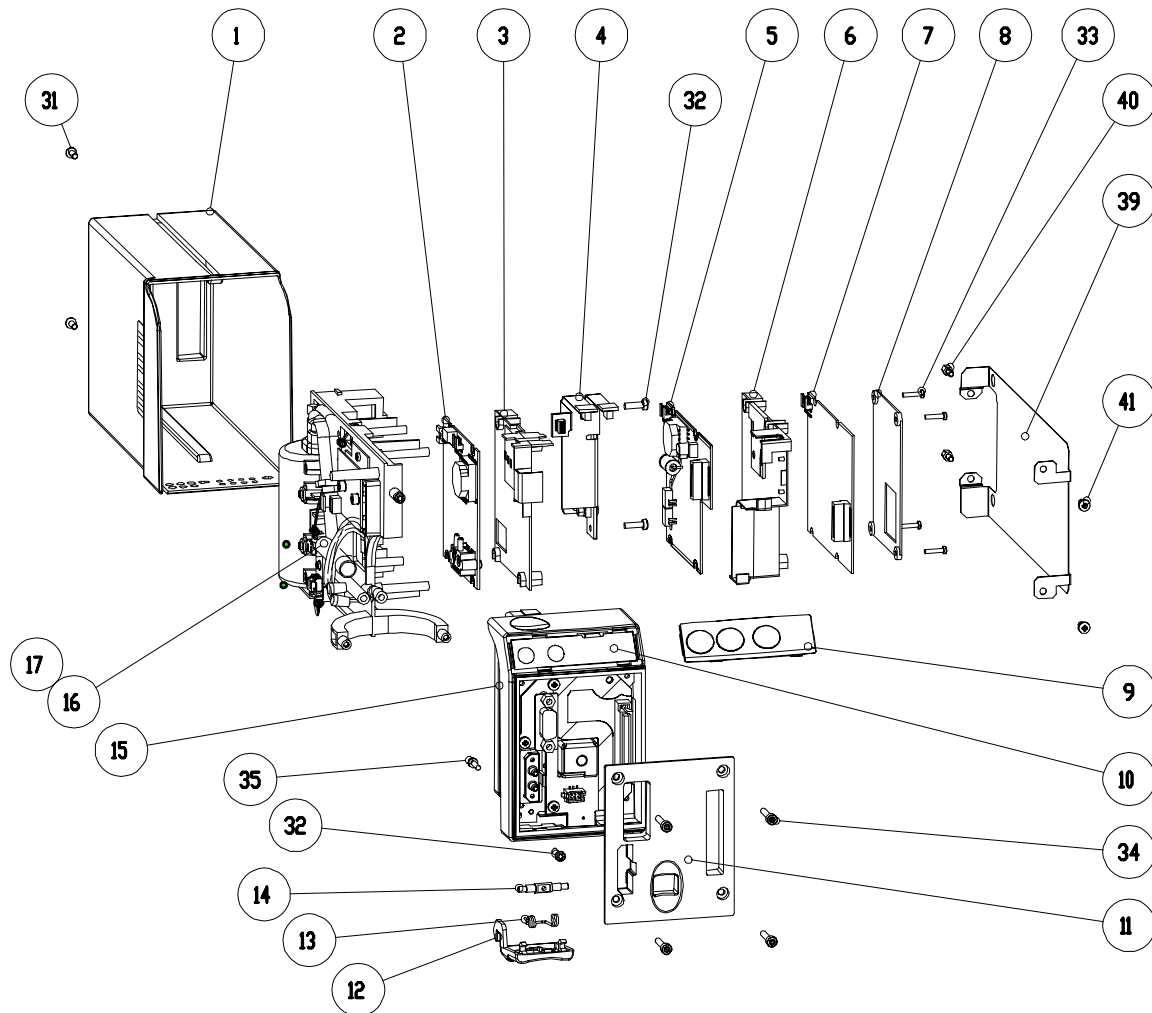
Exploded view of the Hemodynamic Module E-MRIPSN
